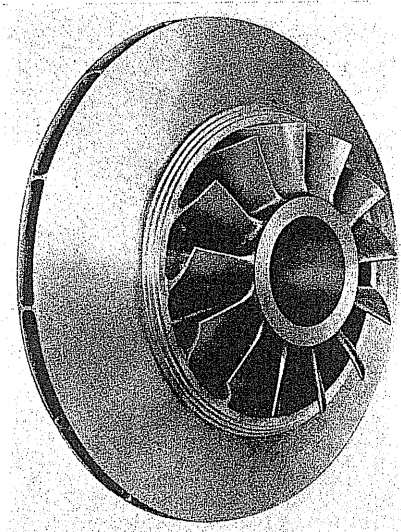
Impeller with fixed blades on the shroud (Demag).
